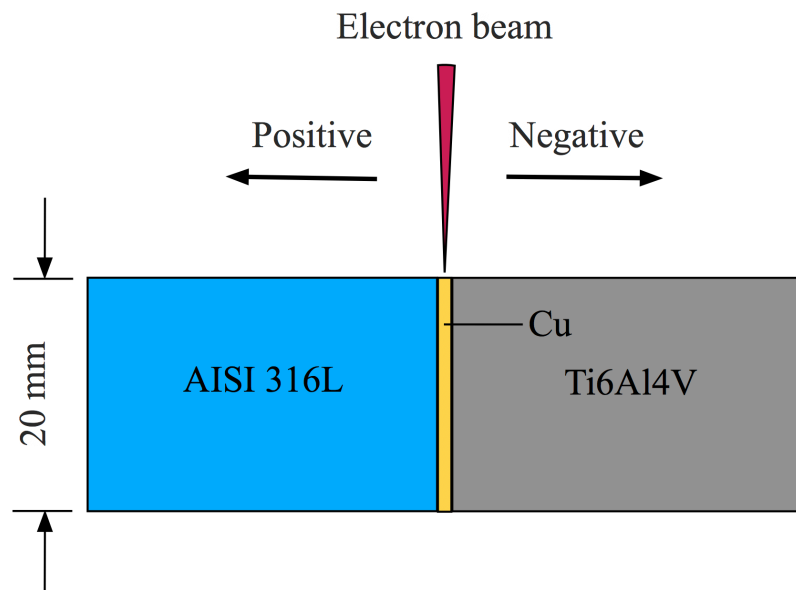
A schematic representation of the Ti6Al4V – Cu – AISI 316L weld.
